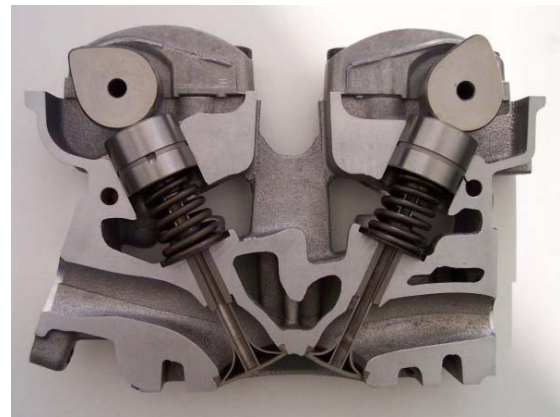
Double overhead camshaft (DOHC) valve arrangement [19].
